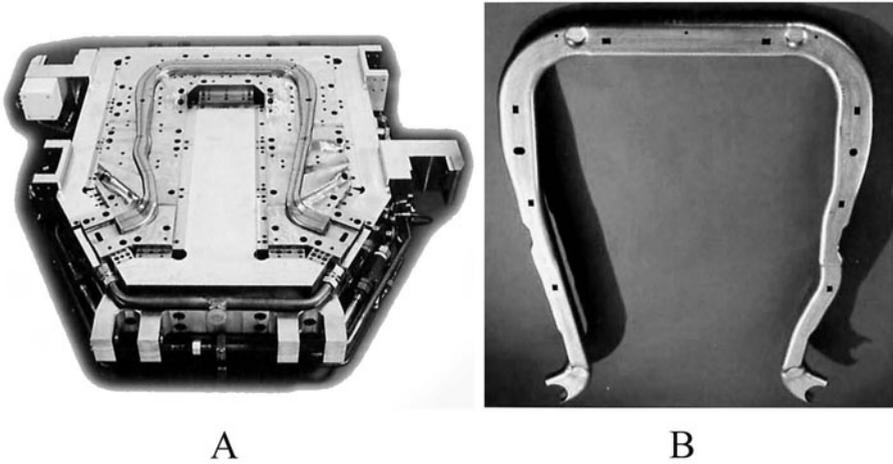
A cradle (B) manufactured from die hydroforming of a steel tube (A).
